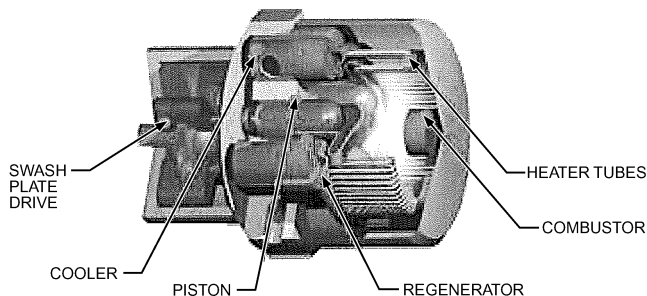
Cutaway Core of a Kinematic Stirling Engine
